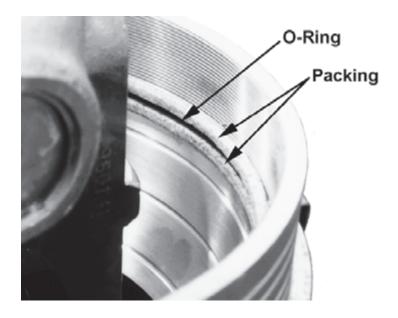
Replacement of Thrust Socket Packing and O-Ring
